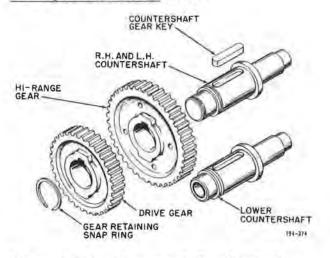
Compound Countershaft Assembly (TRDXL10170)
